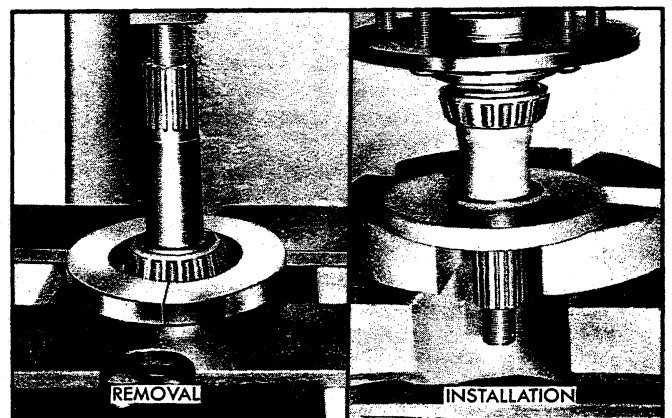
Removing and Installing Drive Spindle Outer Bearing (Corvette)
